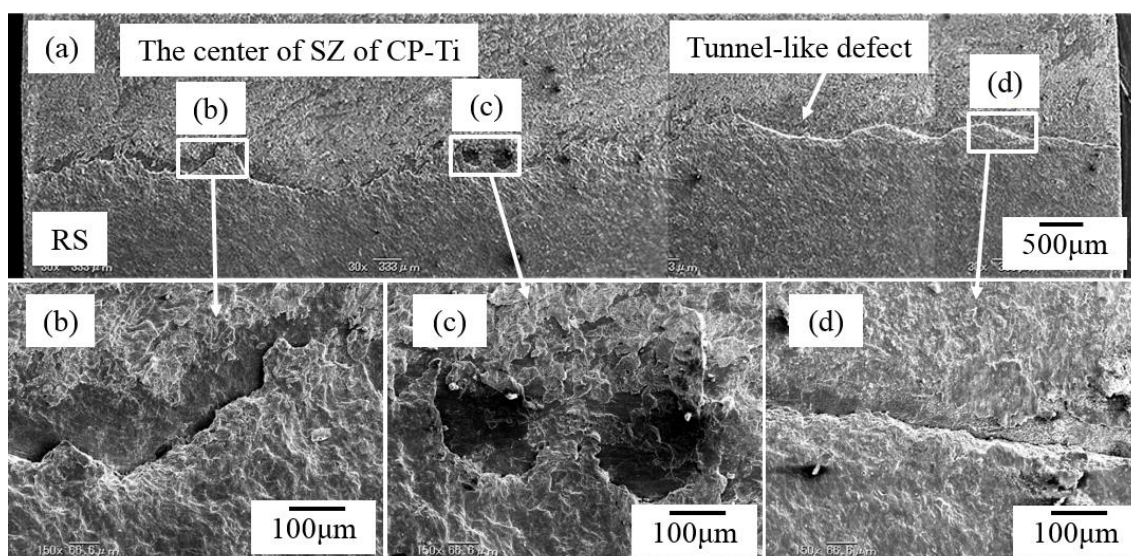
Fracture surfaces of CP-Ti side of the tensile shear test sample welded with probe length of 0.9 mm.
